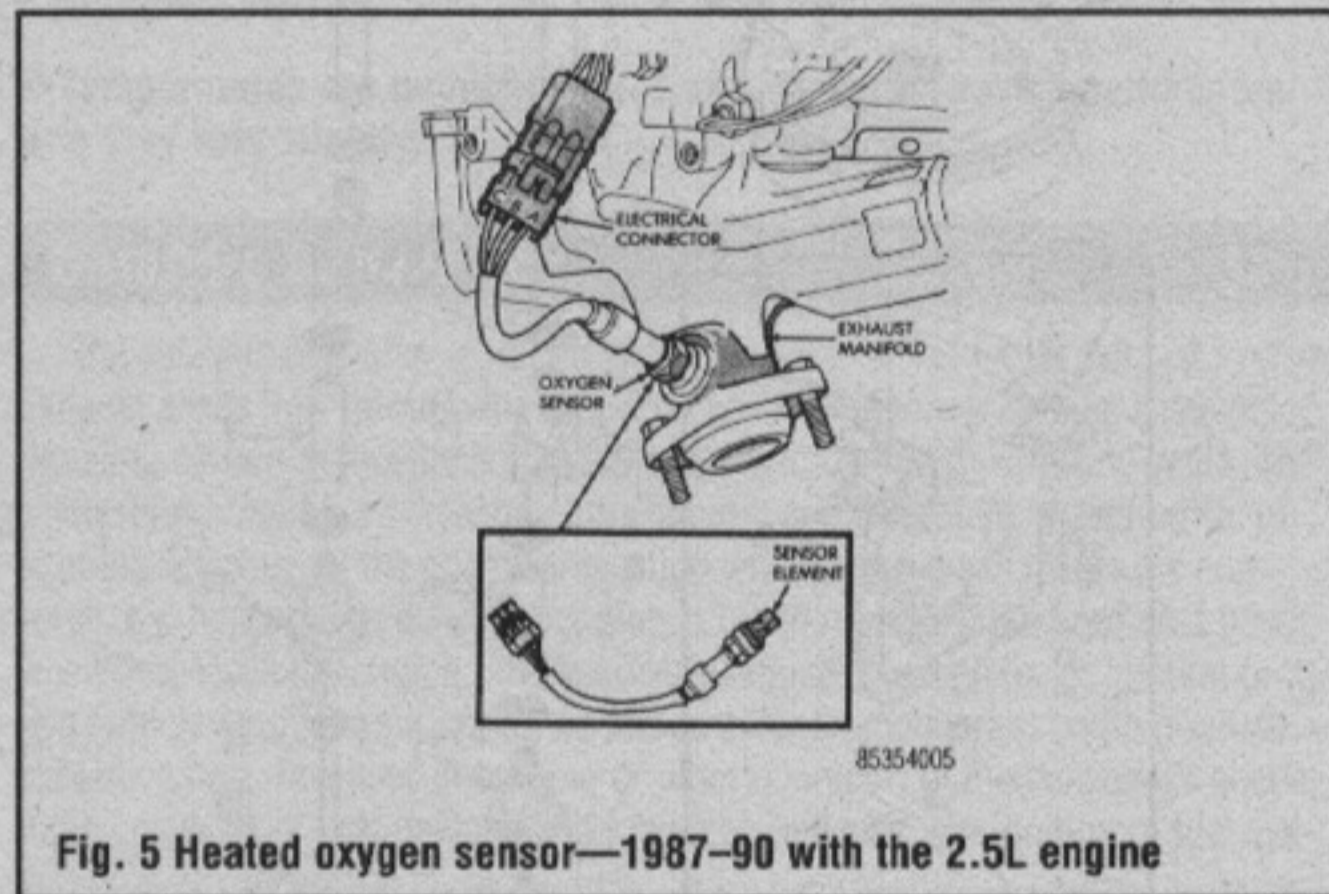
Heated oxygen sensor—1987–90 with the 2.5L engine
